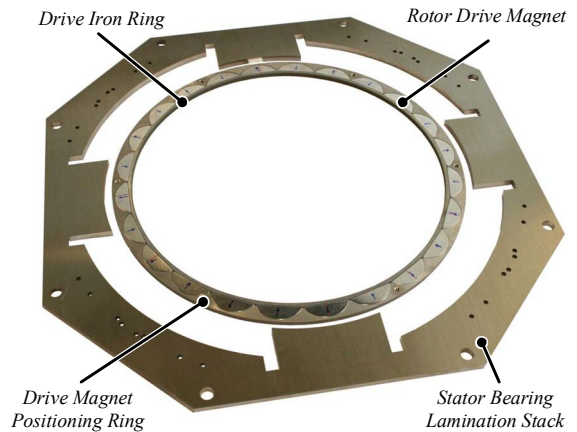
Photography of rotor inside showing round-shaped drive magnets being placed between the drive iron ring and the drive magnet positioning ring.
